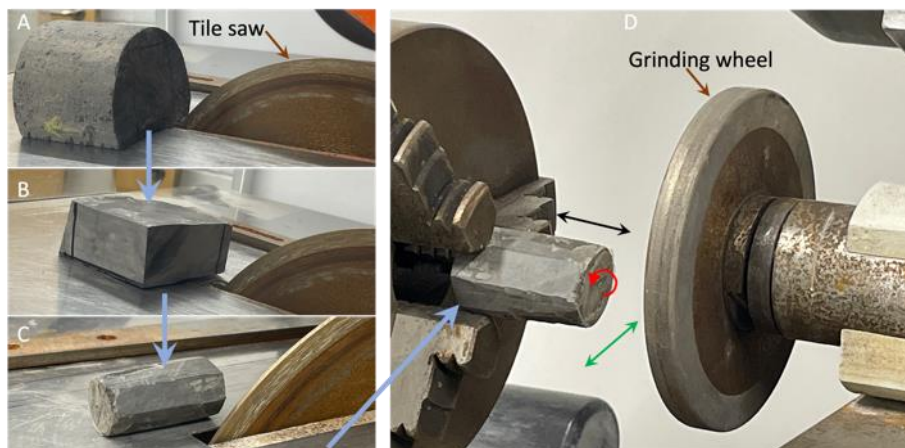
Photos showing stages of cutting and grinding procedures. (A) Initial shale block, (B) Intermediate cutting stage, (C) Polygonal prism, (D) Grinding stage: the grinding wheel moves left-right (black double-headed arrow) while rotating to cut along the prism axis. Then the grinding wheel moves in-out (green double-headed arrow) to square the end faces (see the text for details). The polygonal prism is rotating along its axis during the cutting process.
